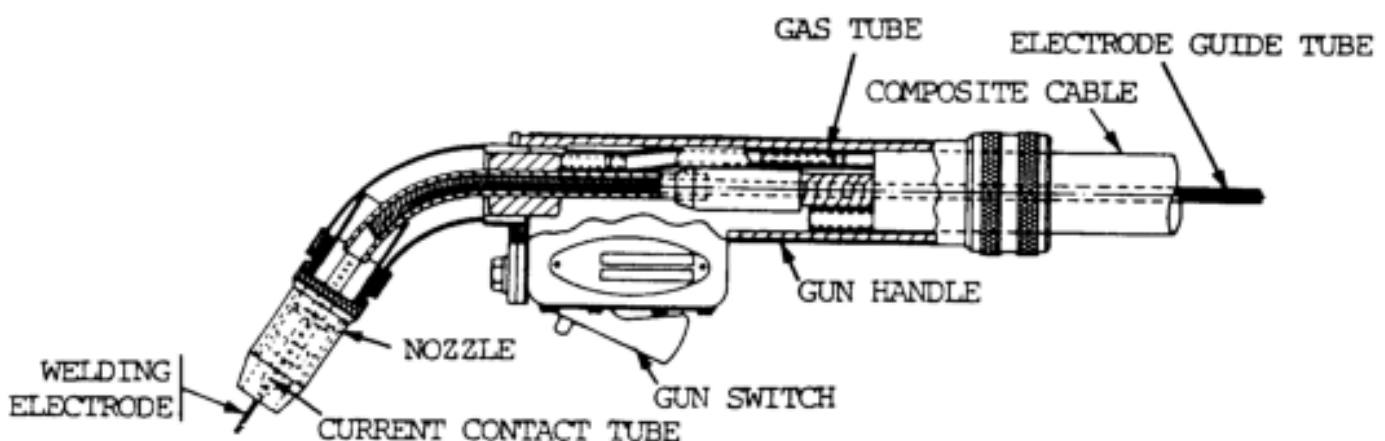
Typical semiautomatic gas-cooled, curved-neck gas metal arc welding gun.
